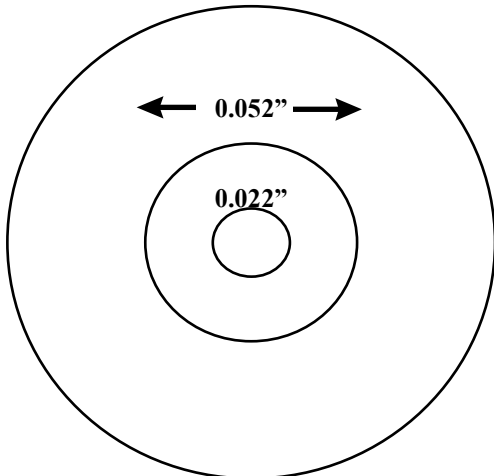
0.052 circular Gnd clearance with an 0.022" PTH gives a Cap. of 1.06pF
